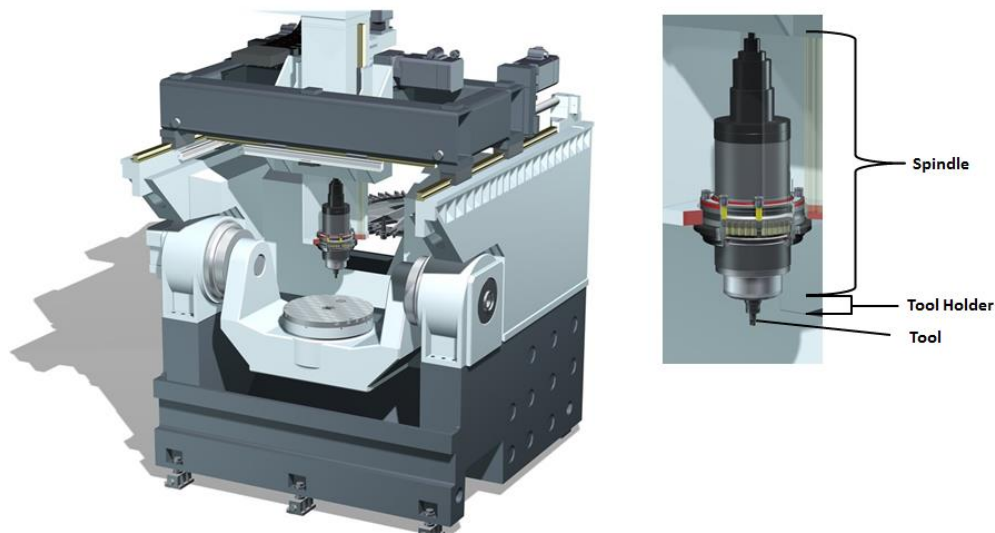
Position of the spindle in a milling machine adapted from [Jakobantriebs technik]
